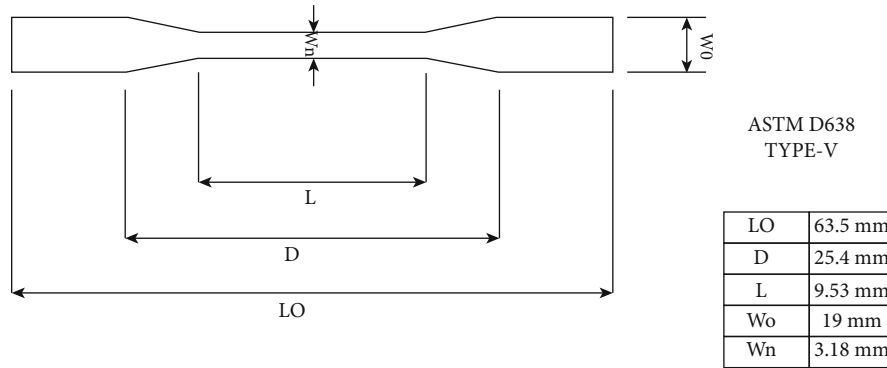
Geometrical standard of ASTM D638 type V [45].
